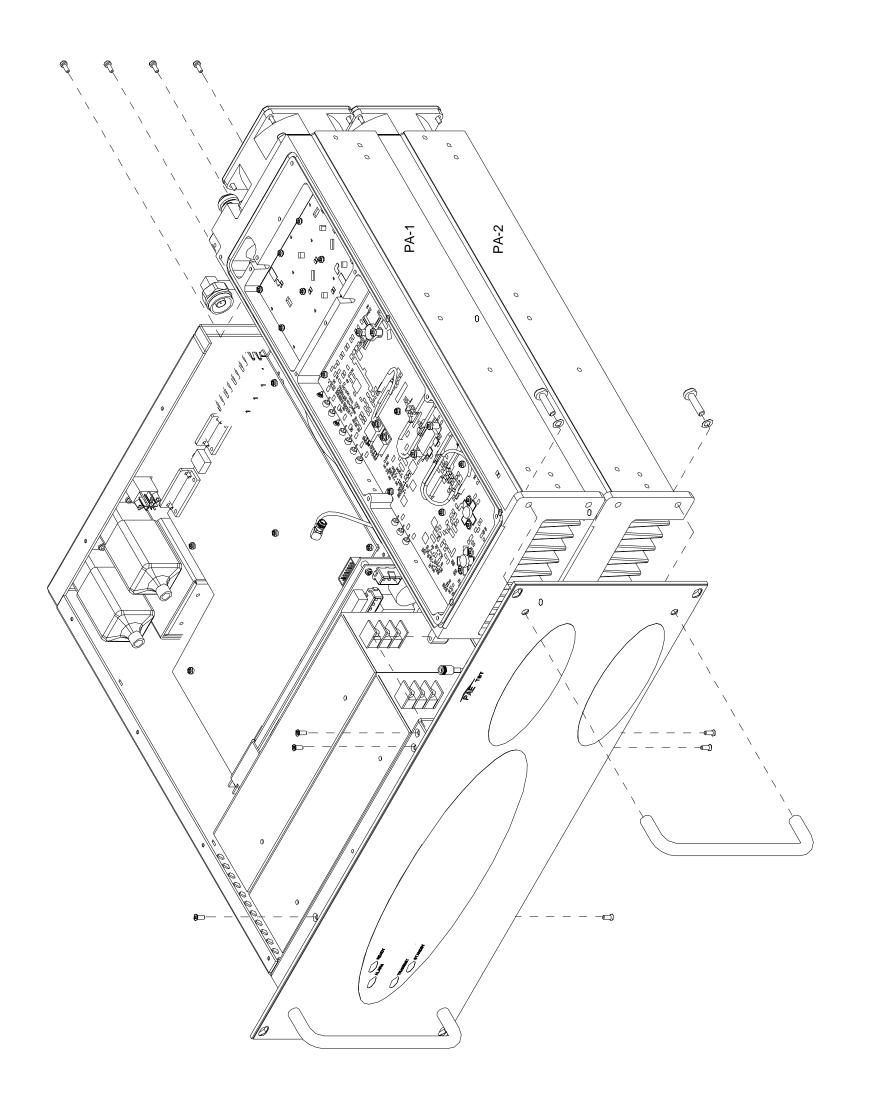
T6T VHF Amplifier Front Panel PCB - Removal and Refitting Detail
